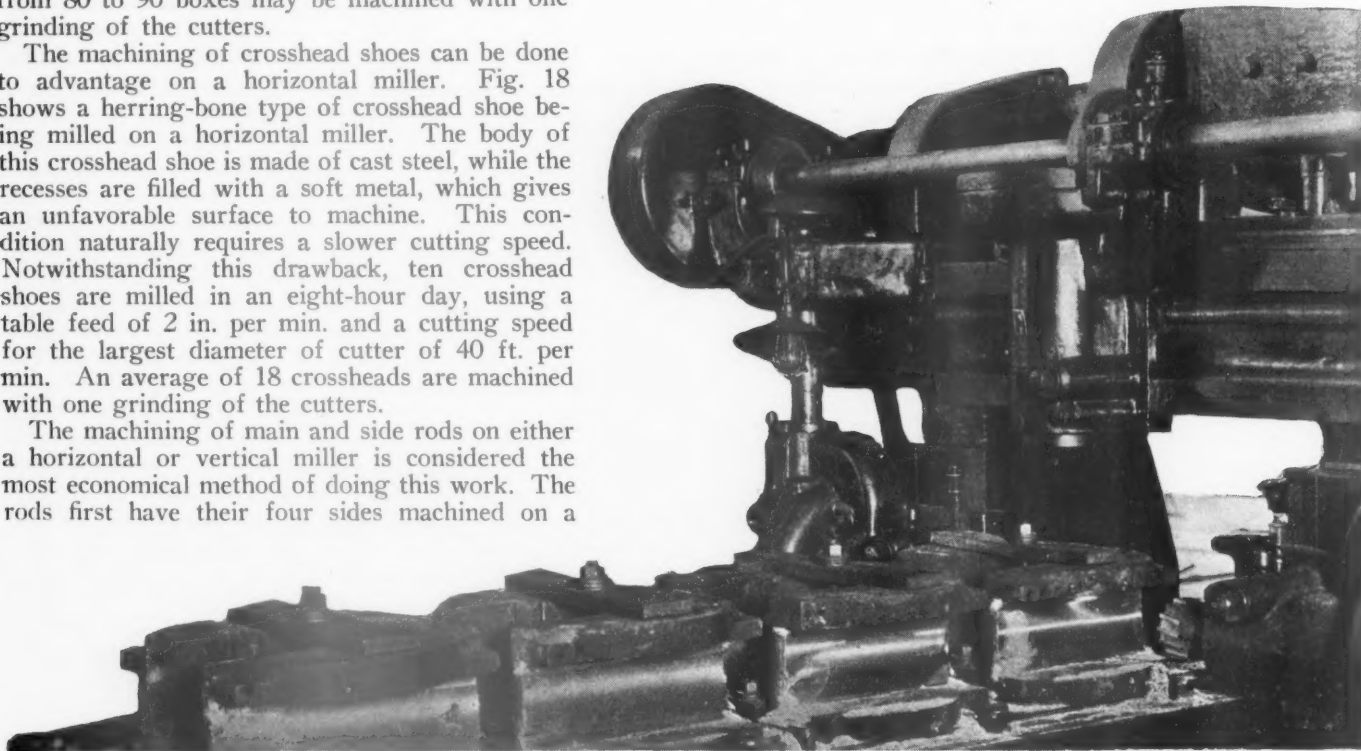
Milling the shoe and wedge fits of driving boxes using two inserted tooth facing cutters
